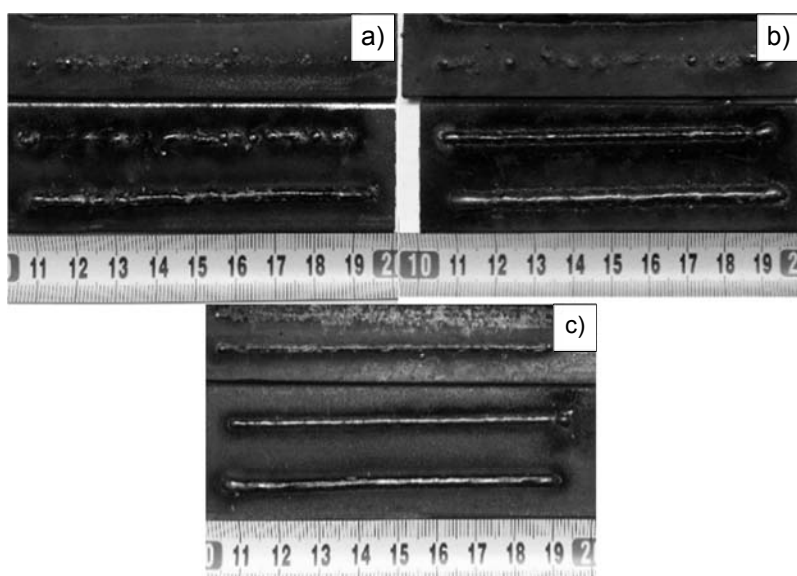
Welding at 40A a) standard, b) pulse c) CMT (different welding speed from bottom to top: 3, 7.5, 12 mm/s)
